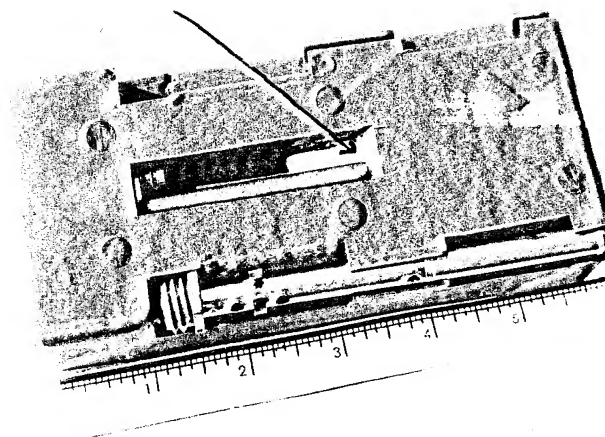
Armed "clam" with the end and part of the bottom of the cap well cut out.
